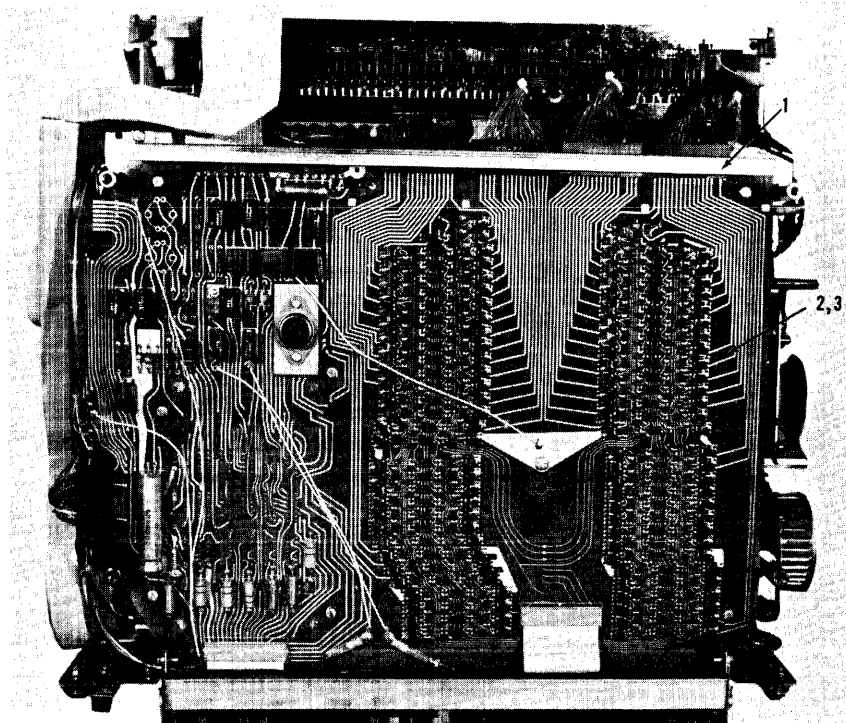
Frame Assembly (Bottom View) with HHD Board TermiNet 1200 Printer
